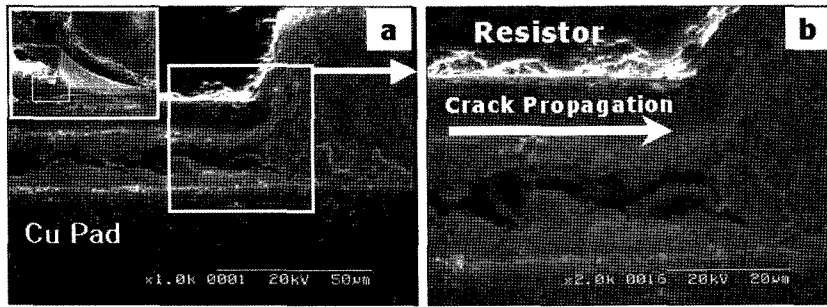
Cross section images of 3216 chip resistor soldered with Sn-40 Pb after thermal shock test, 1400 cycles: (a) overall shape of joint and (b) magnified view of crack tip.
